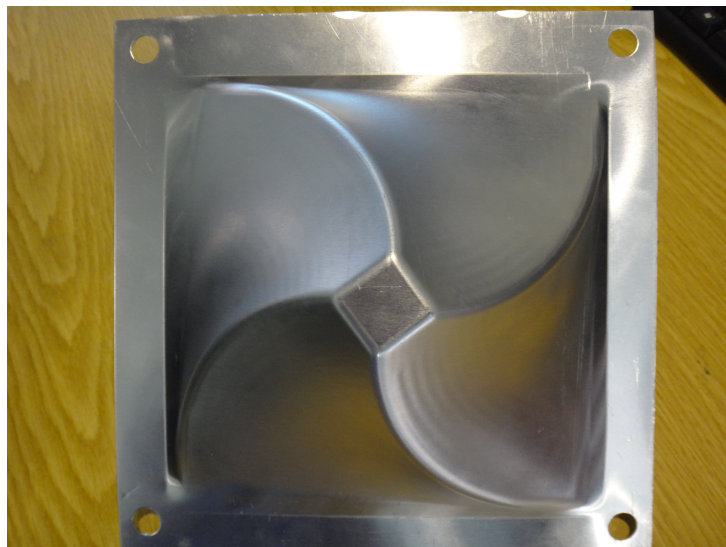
45° twisted pyramid in a 1 millimeter thick aluminum sheet.
